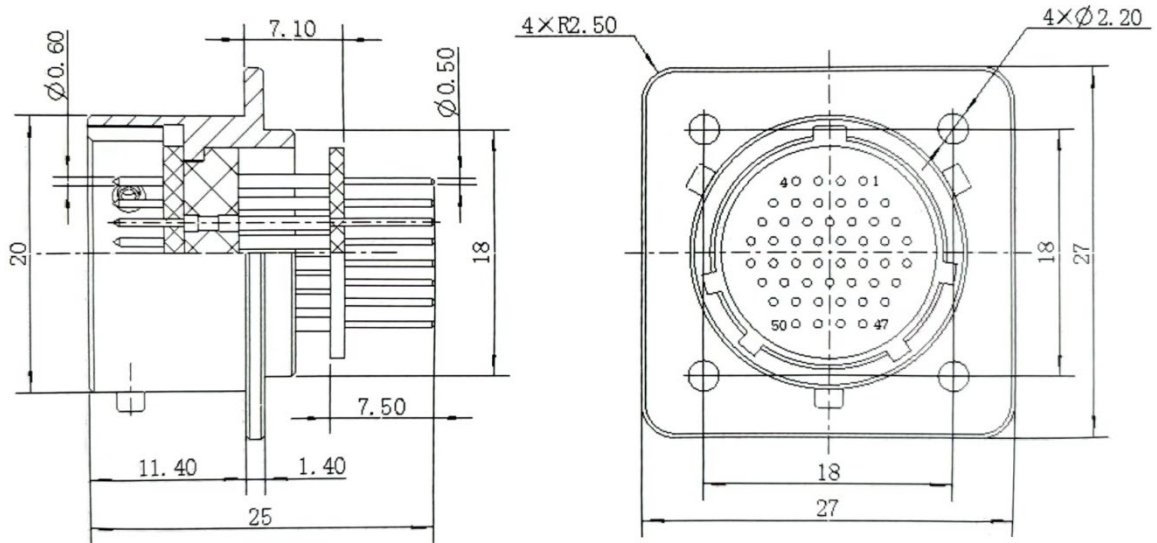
ZH127-2-50/18-BL1-1-B receptacle product dimensions drawing
